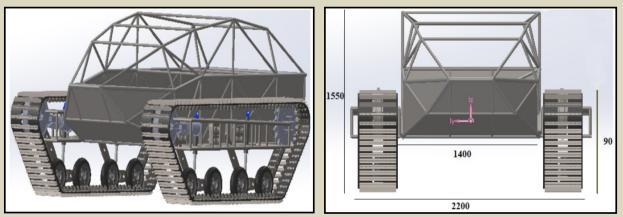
Isometric and front view of rubber tracking vehicle final design
